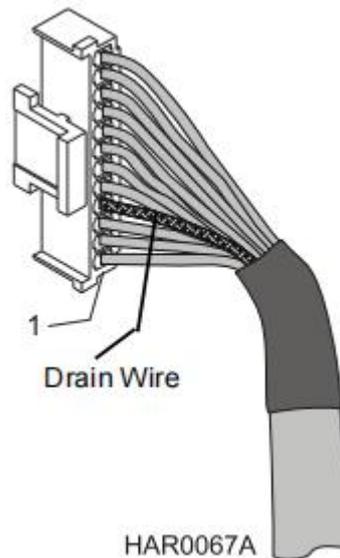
Feedback and Shrouded Control Cable Assemblies – Example
